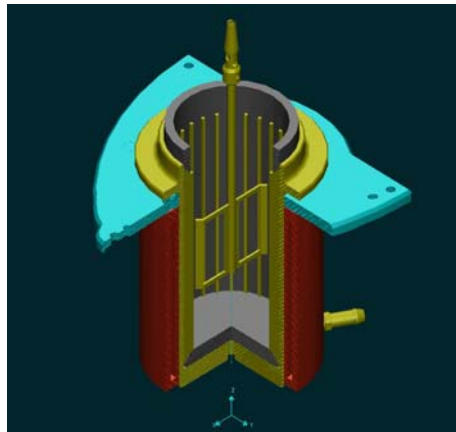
Cross-section of the measuring cell for building materials with adapter plate, temperature control unit incl. vane rotor
